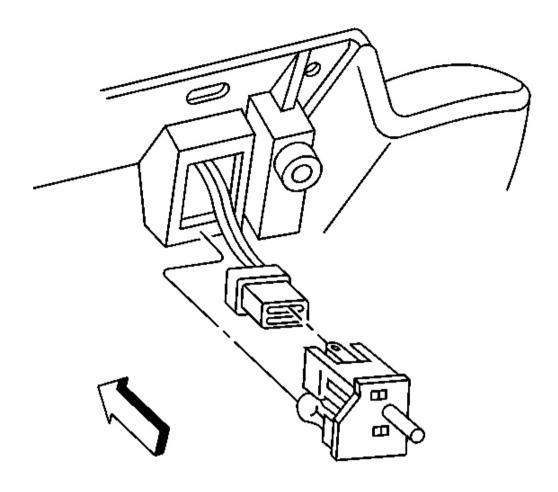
IP Compartment Lamp & Switch To IP Passenger Compartment Courtesy of GENERAL MOTORS CORP.
